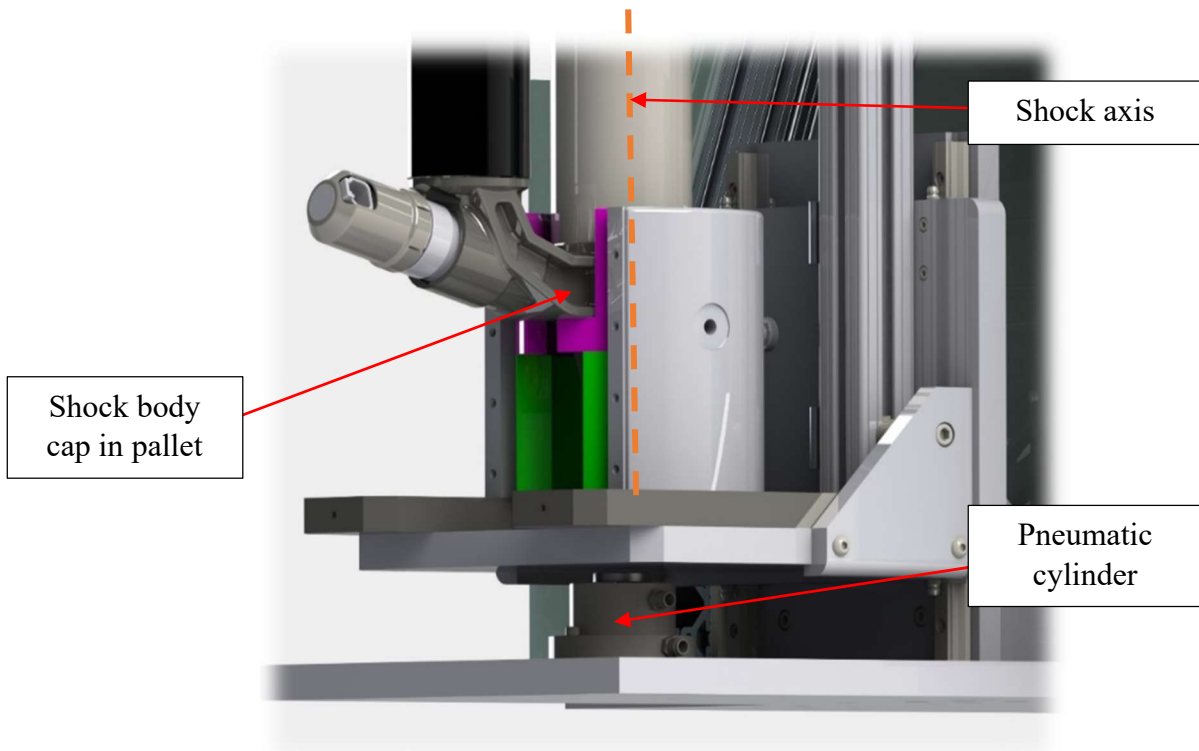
Lower fixturing assembly, cylinder in line with shock axis
